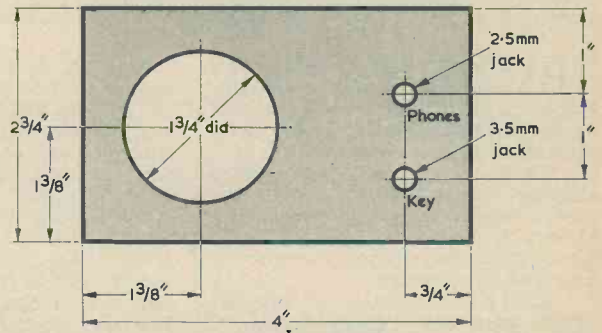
How the front panel is drilled. The diameters of the jack socket holes depend on the particular sockets used
